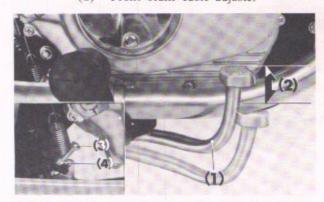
(1) Rear brake pedal (2) Free play (3) Pedal stopper bolt (4) Lock nut
